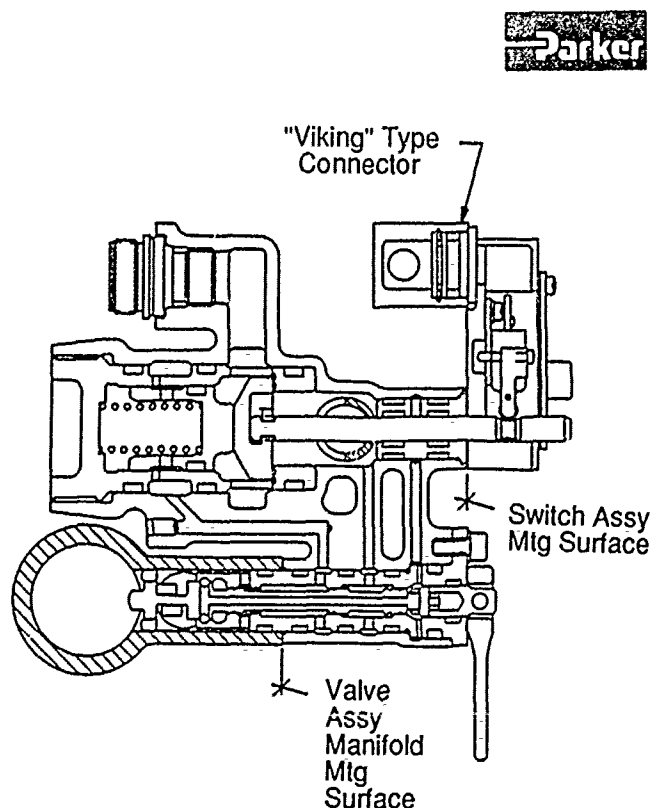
Parker - RLS Shutoff Valve Detail Drawing
